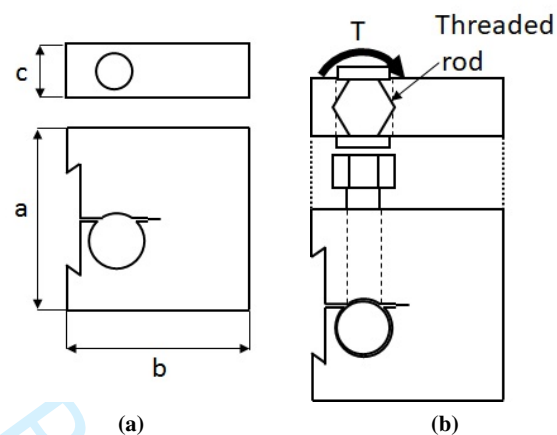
(a) Wedge opening load specimen. a is 15.75 mm, b is 20.25 mm and c is 6.35 mm. (b) Wedge opening load specimen testing diagram.
